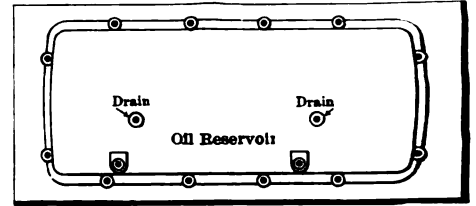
Illustrating oil pan of the Marion "30," with drain plug and bolt holes shown
